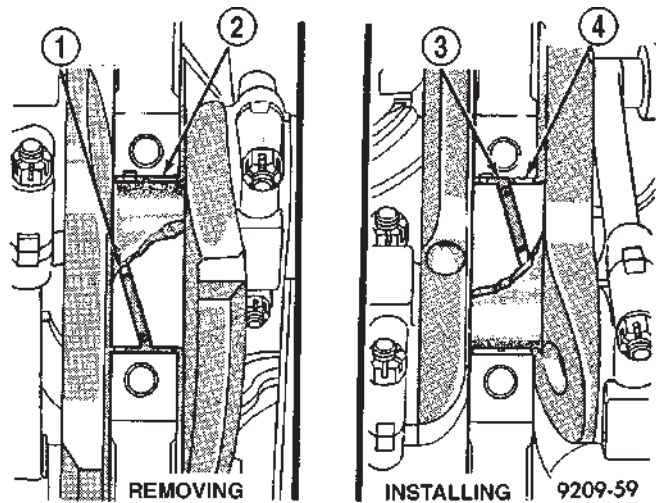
Upper Main Bearing Removal and Installation with Tool C-3059
